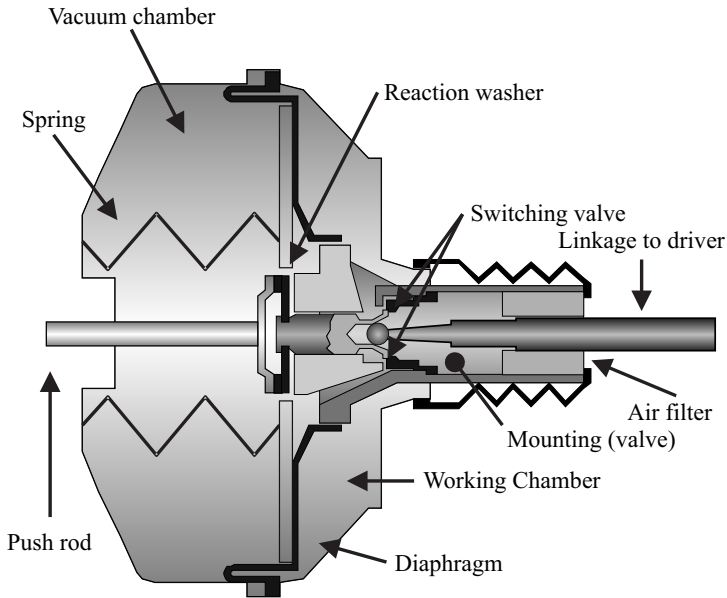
Cut-away drawing of a vacuum brake booster
